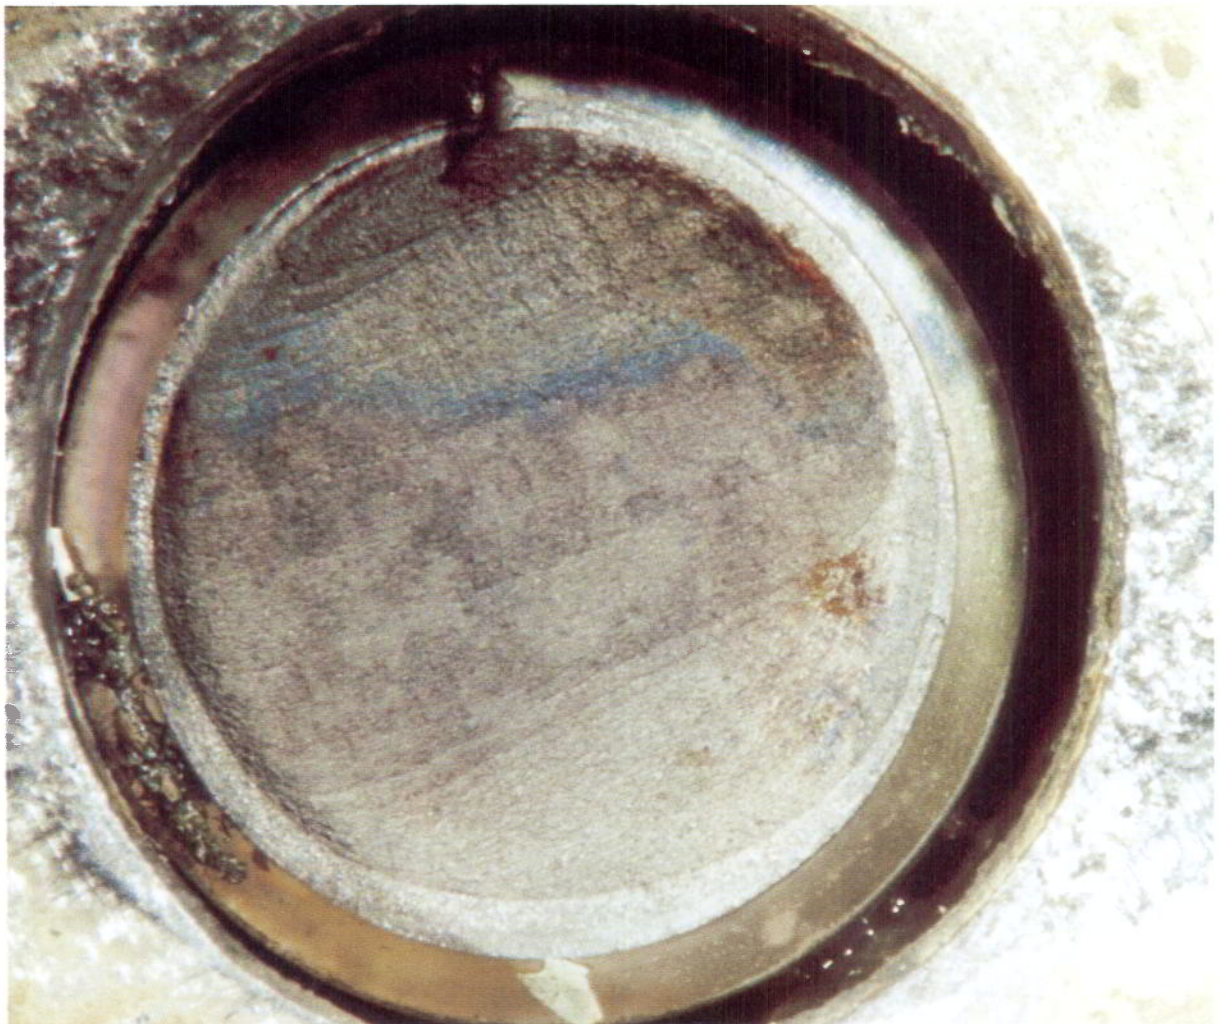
B: Showing fracture surface of lower (threaded) end of tail rotor gearbox upper attachment bolt, with shallow (bright) annular band of initial radial fatigue propagation from the thread root, and secondary bending fatigue striations clearly evident emanating from upper arc, before the final overload failure evident within lower segment of fracture.
